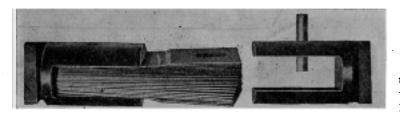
FLANGE FLEXIBLE COUPLING.
